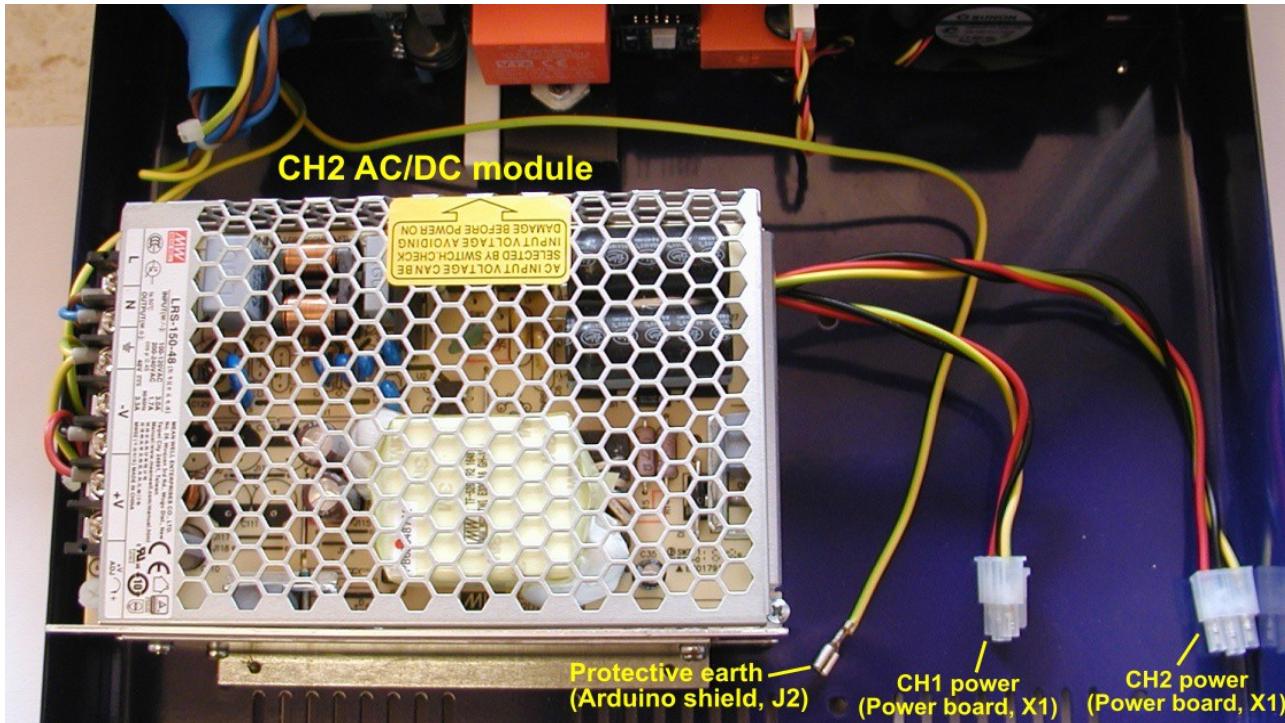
Top (CH2) AC/DC module with Cable set #2 mounted (without terminal cover)
